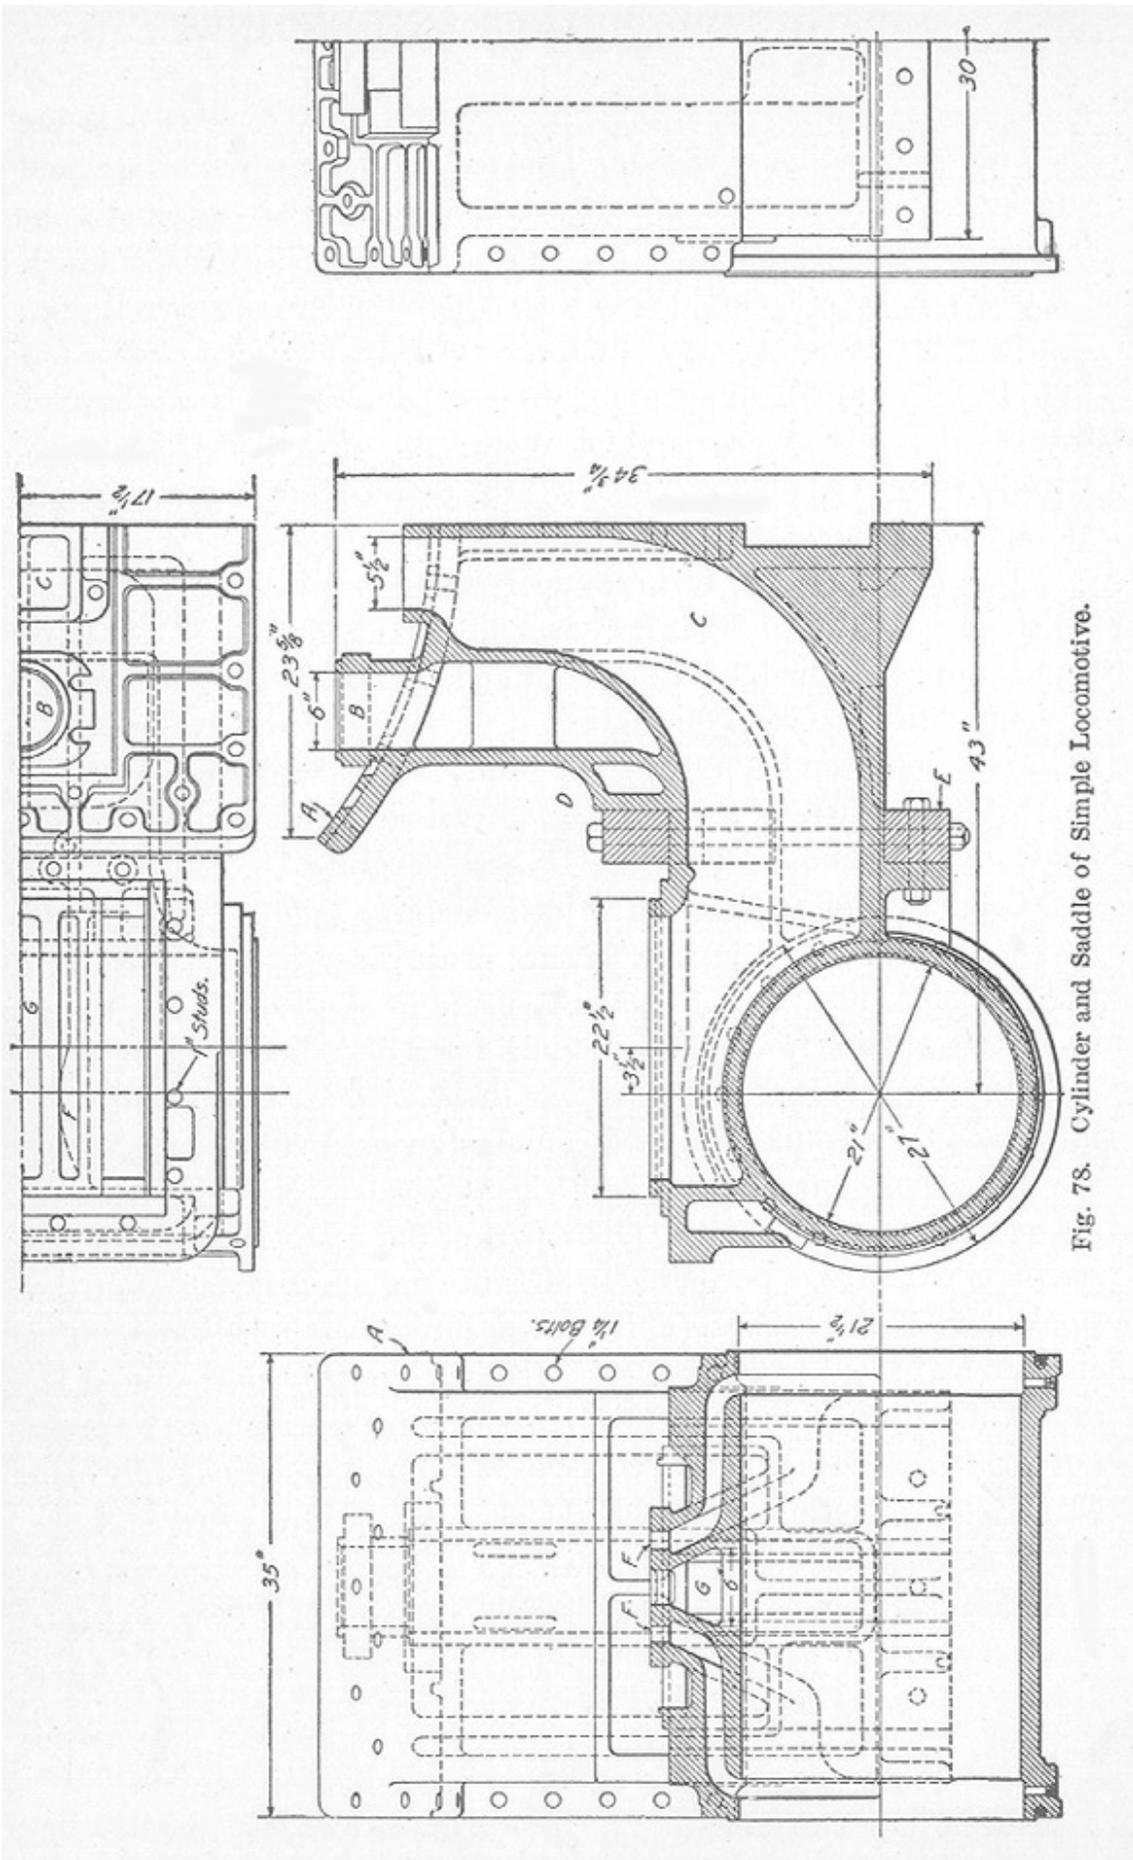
Cylinder and Saddle of Simple Locomotive.
